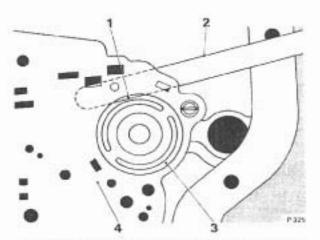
METHOD OF TEMPORARILY HOLDING FRONT SERVO PISTON IN POSITION (TRANSMISSION INSTALLED IN A VEHICLE)
